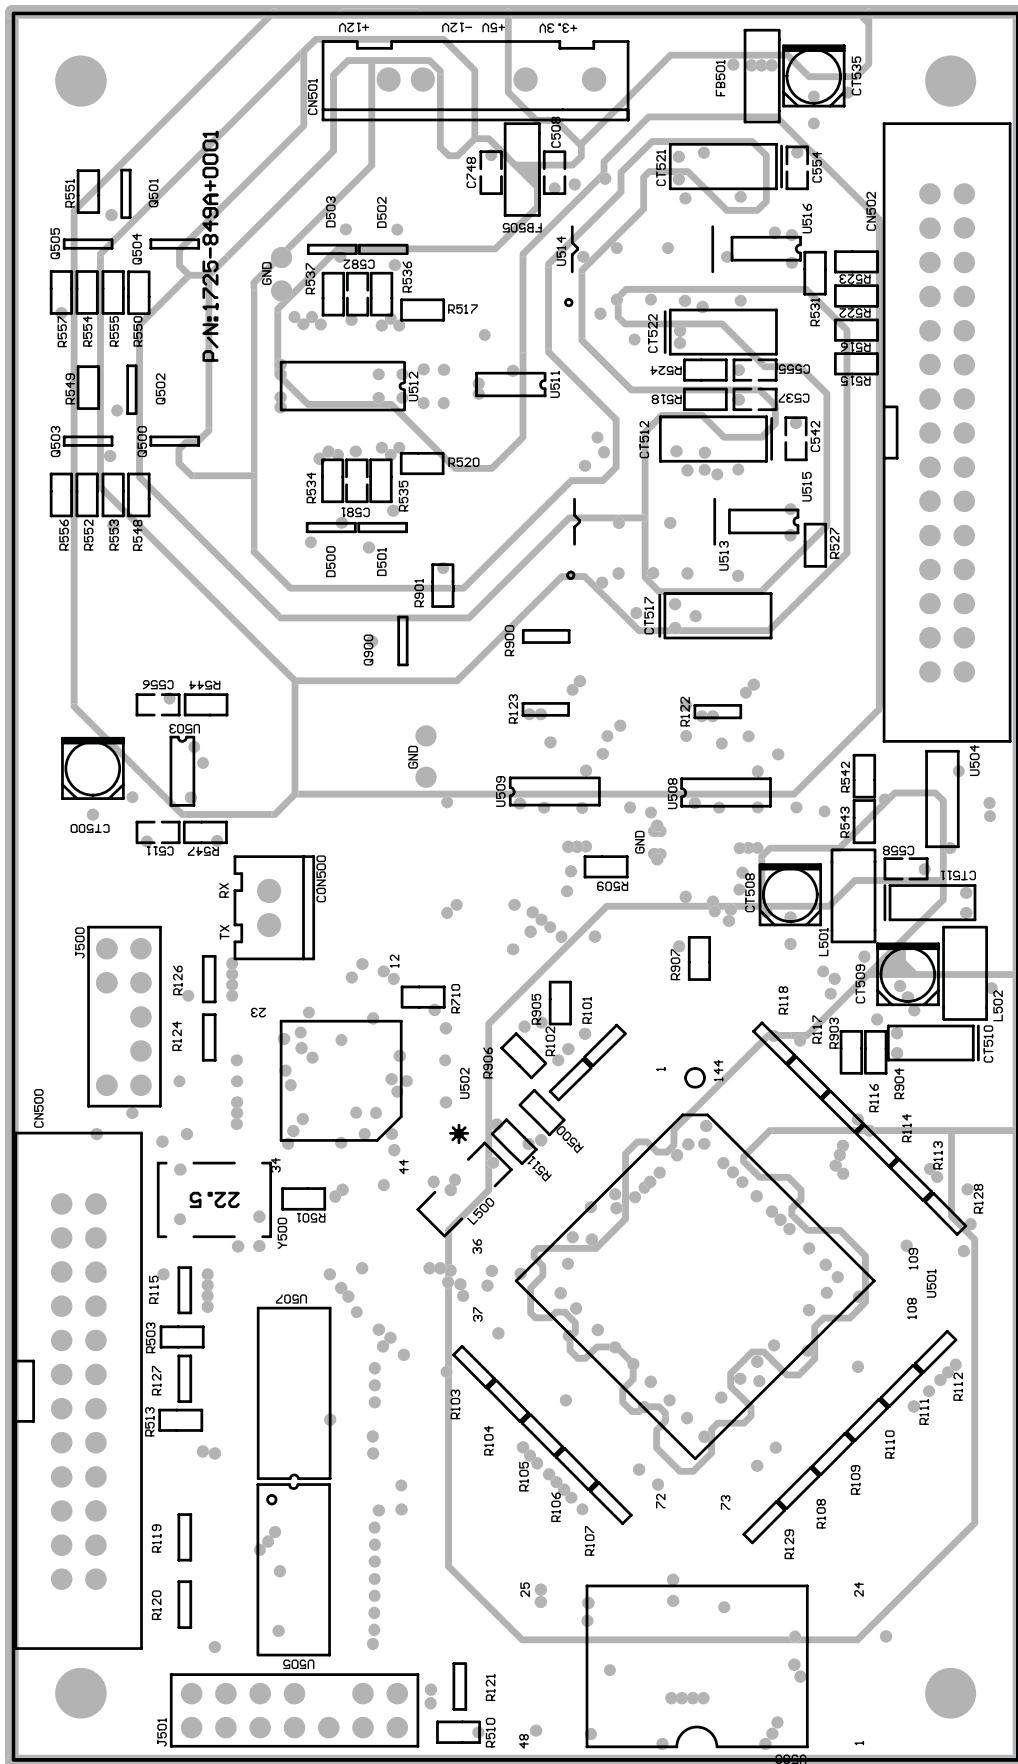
DSP PCB Internal Etch Layer 2 and Component Layout
